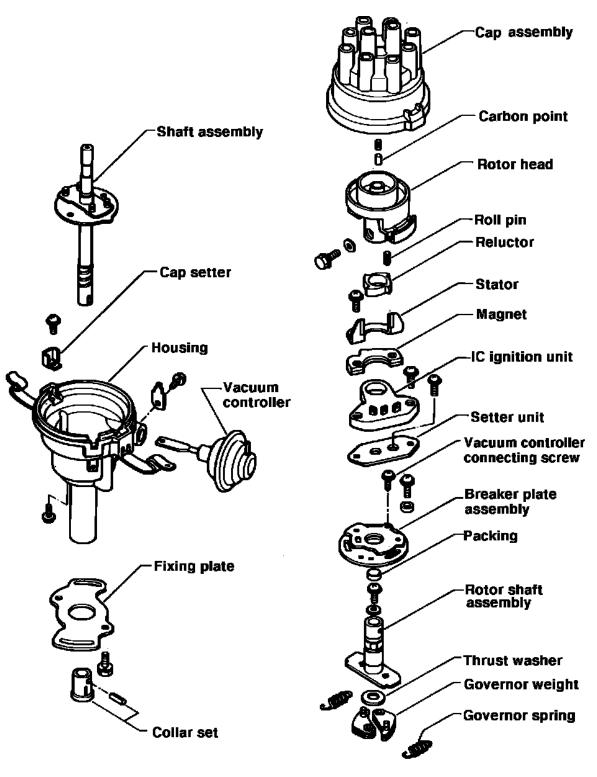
Exploded view of IC type distributor with internal IC unit (typical):
